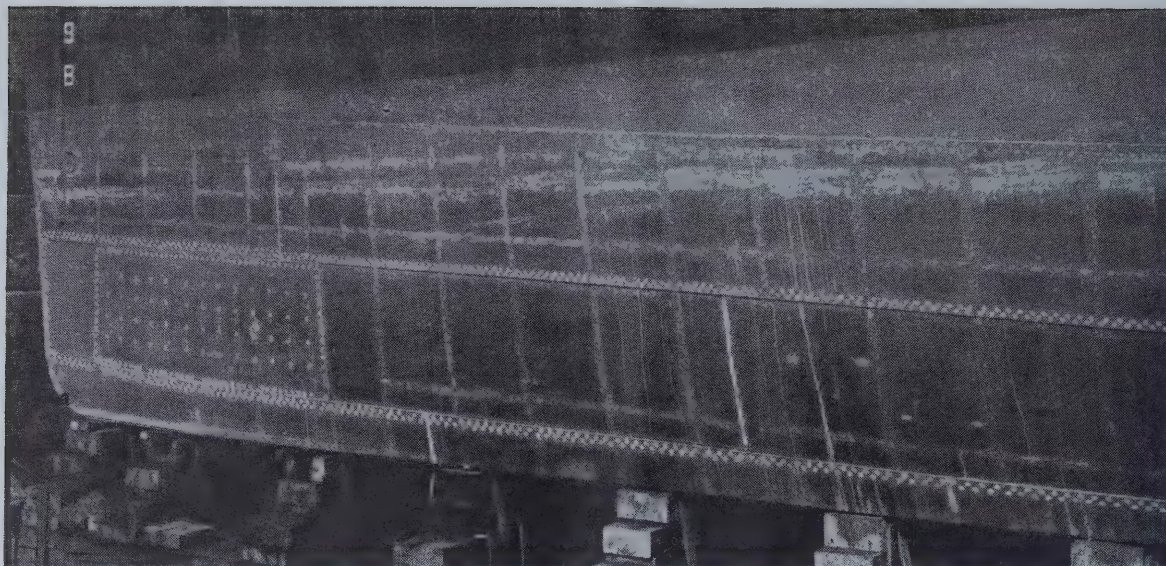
Port bow of U. S. S. Monaghan showing how deposit occurs only on rivet points, butt welds and spots located over areas of interior welding
